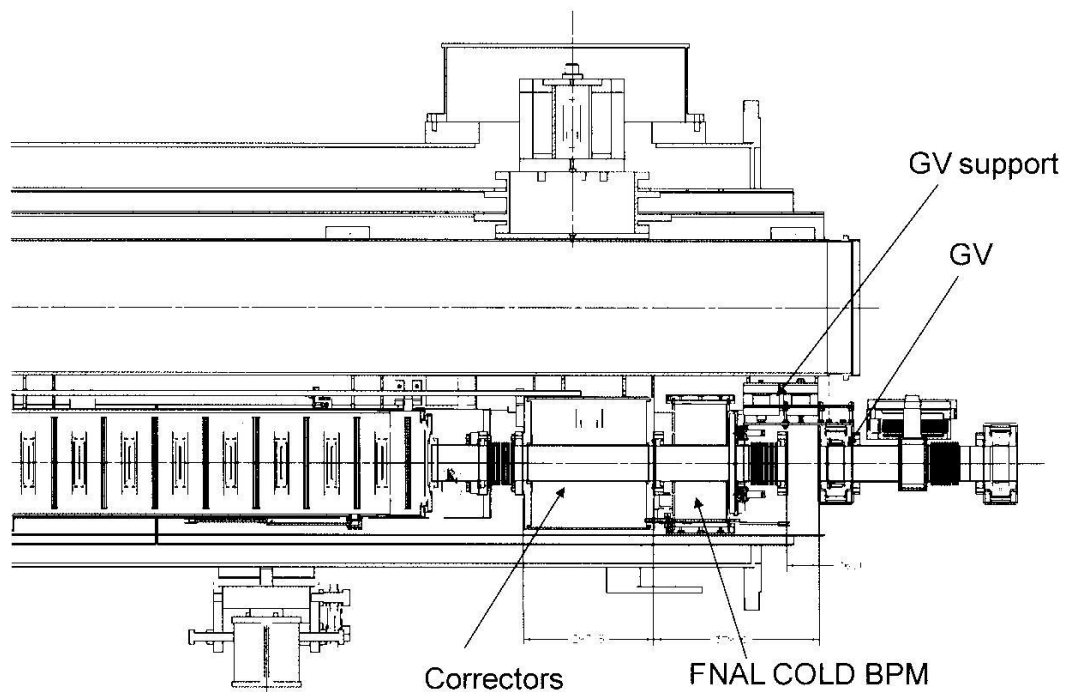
A draft sketch of the corrector package layout in a Type 3+ cryomodule. Corrector magnets are installed in a helium vessel similar to the one designed for the DESY XFEL quad.
